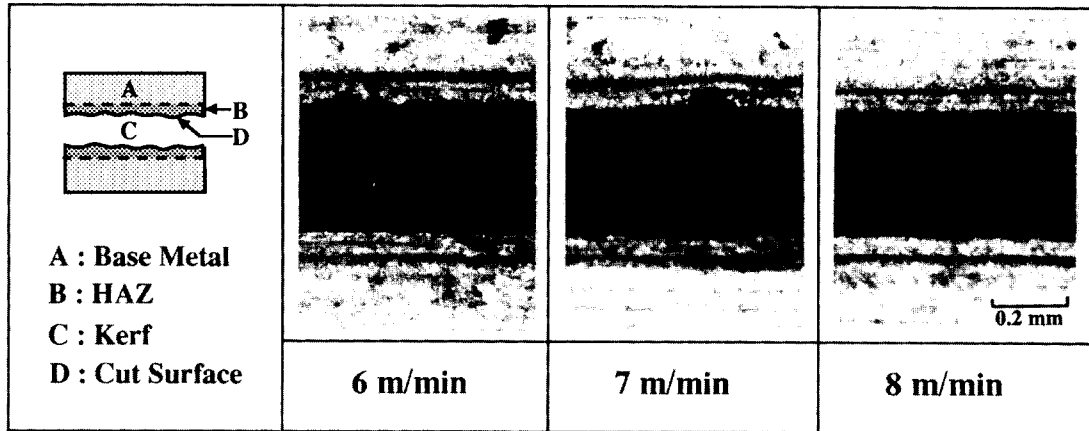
Macroscopic view of the kerf and cut surface profile.
